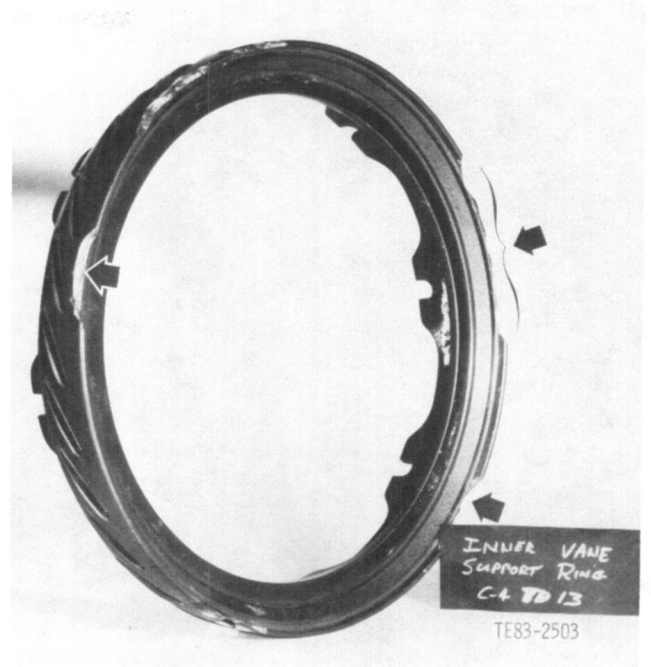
Inner vane support ring after disassembly of engine C-4 (forward view).
